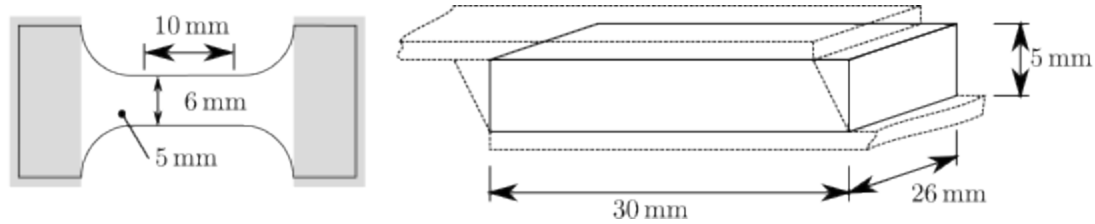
Tensile specimen (left): dimensions of the measured region are given (length and cross-section), the grey areas are held by the grips of the testing machine. Shear specimen: the deformed shape and the metal plates are depicted in dashed lines.
